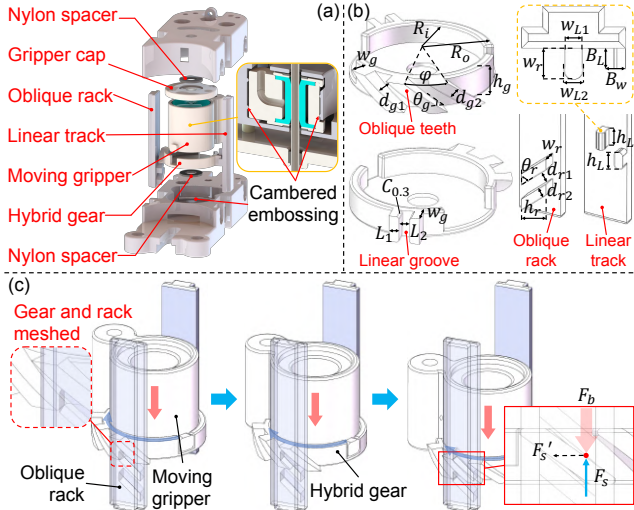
(a) Exploded view and sectional view of the passive rotation mechanism. (b) CAD schematics of the hybrid gear with oblique teeth and linear groove, oblique rack and linear track. C0.3 indicates a chamfer of 0.3 mm. (c) Rotation process of the passive rotation mechanism.
